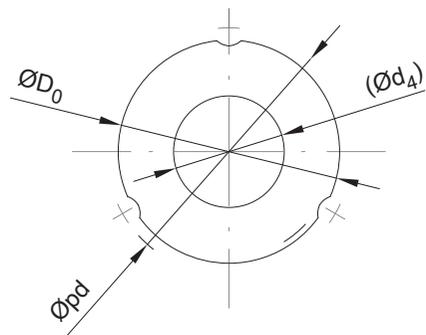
Hole dimension of the Standard Hollow Type Spline Shaft
